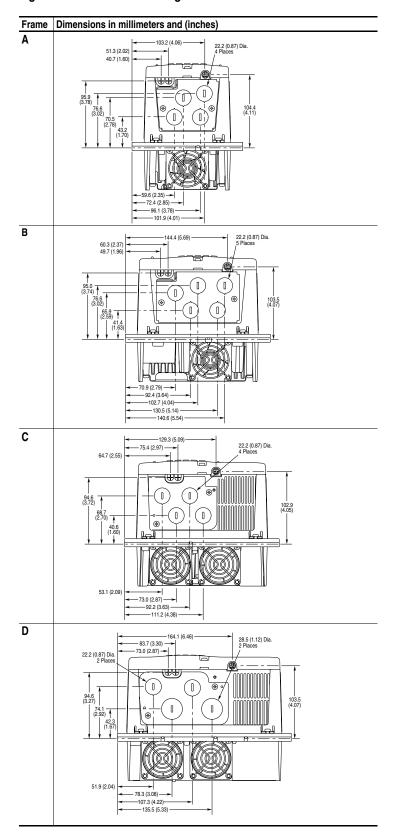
PowerFlex 70 Flange Mount Bottom View Dimensions
